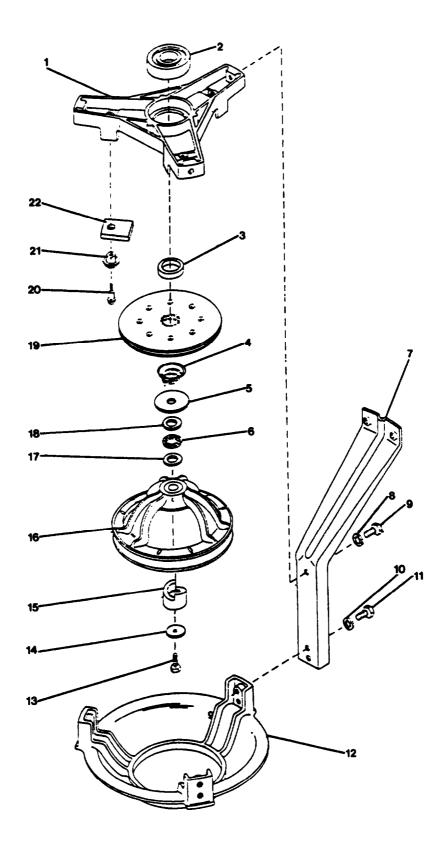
Washer Machine Bearing Housing. Brake/Pulley and Pivot Dome.
